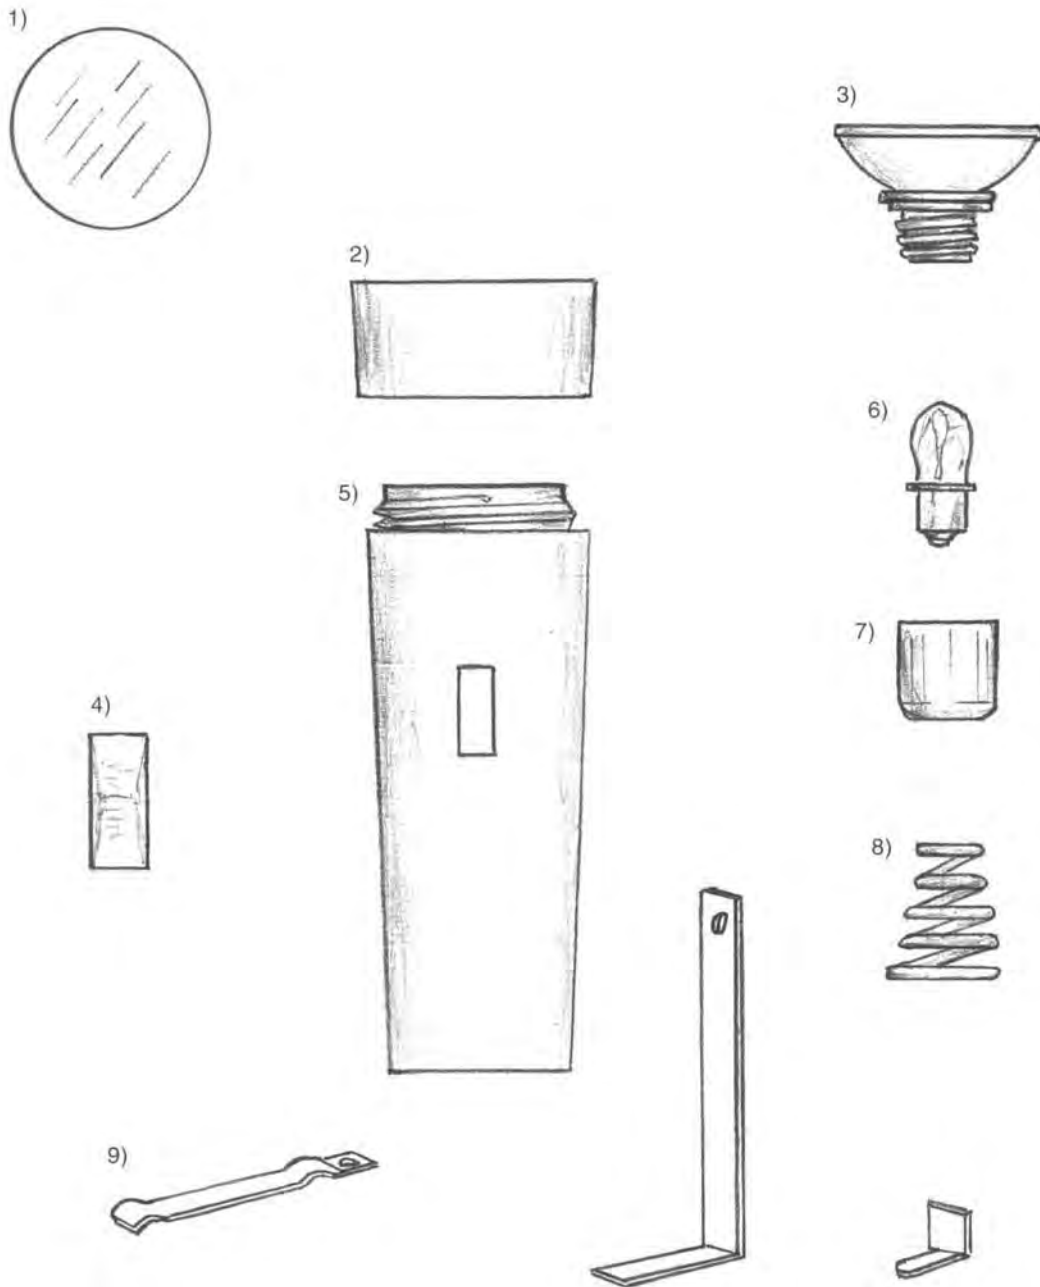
The parts of a typical inexpensive flashlight: 1) lens, 2) top cap 3) subassembly of reflector, lamp connector and lamp base, 4) sliding switch, 5) body, 6) lamp, 7) lamp holder, 8) battery spring, 9) electrical connecting and contact strips.
